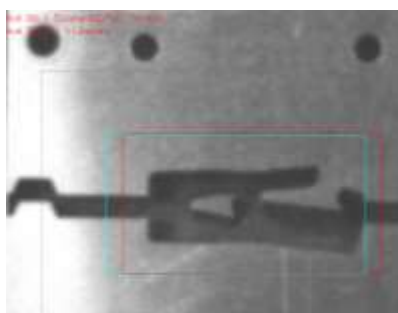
Processing Time Used by Mold Inspection Module for Measurement of Defect
